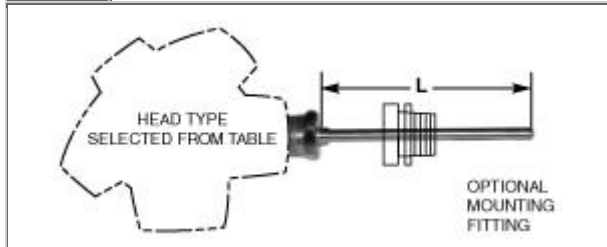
T/C Assembly w/ 1/2" NPT Process Fitting
